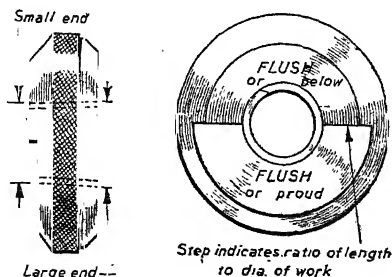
Step ring gauge for taper threads such as American national pipe, or Brigg's.
